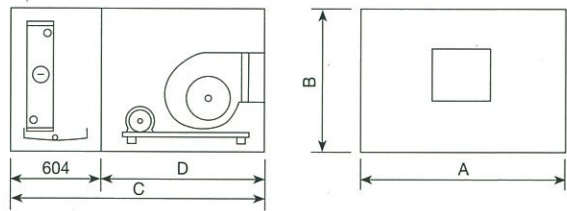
Dimensions (mm) for horizontal units (floor mounted)
